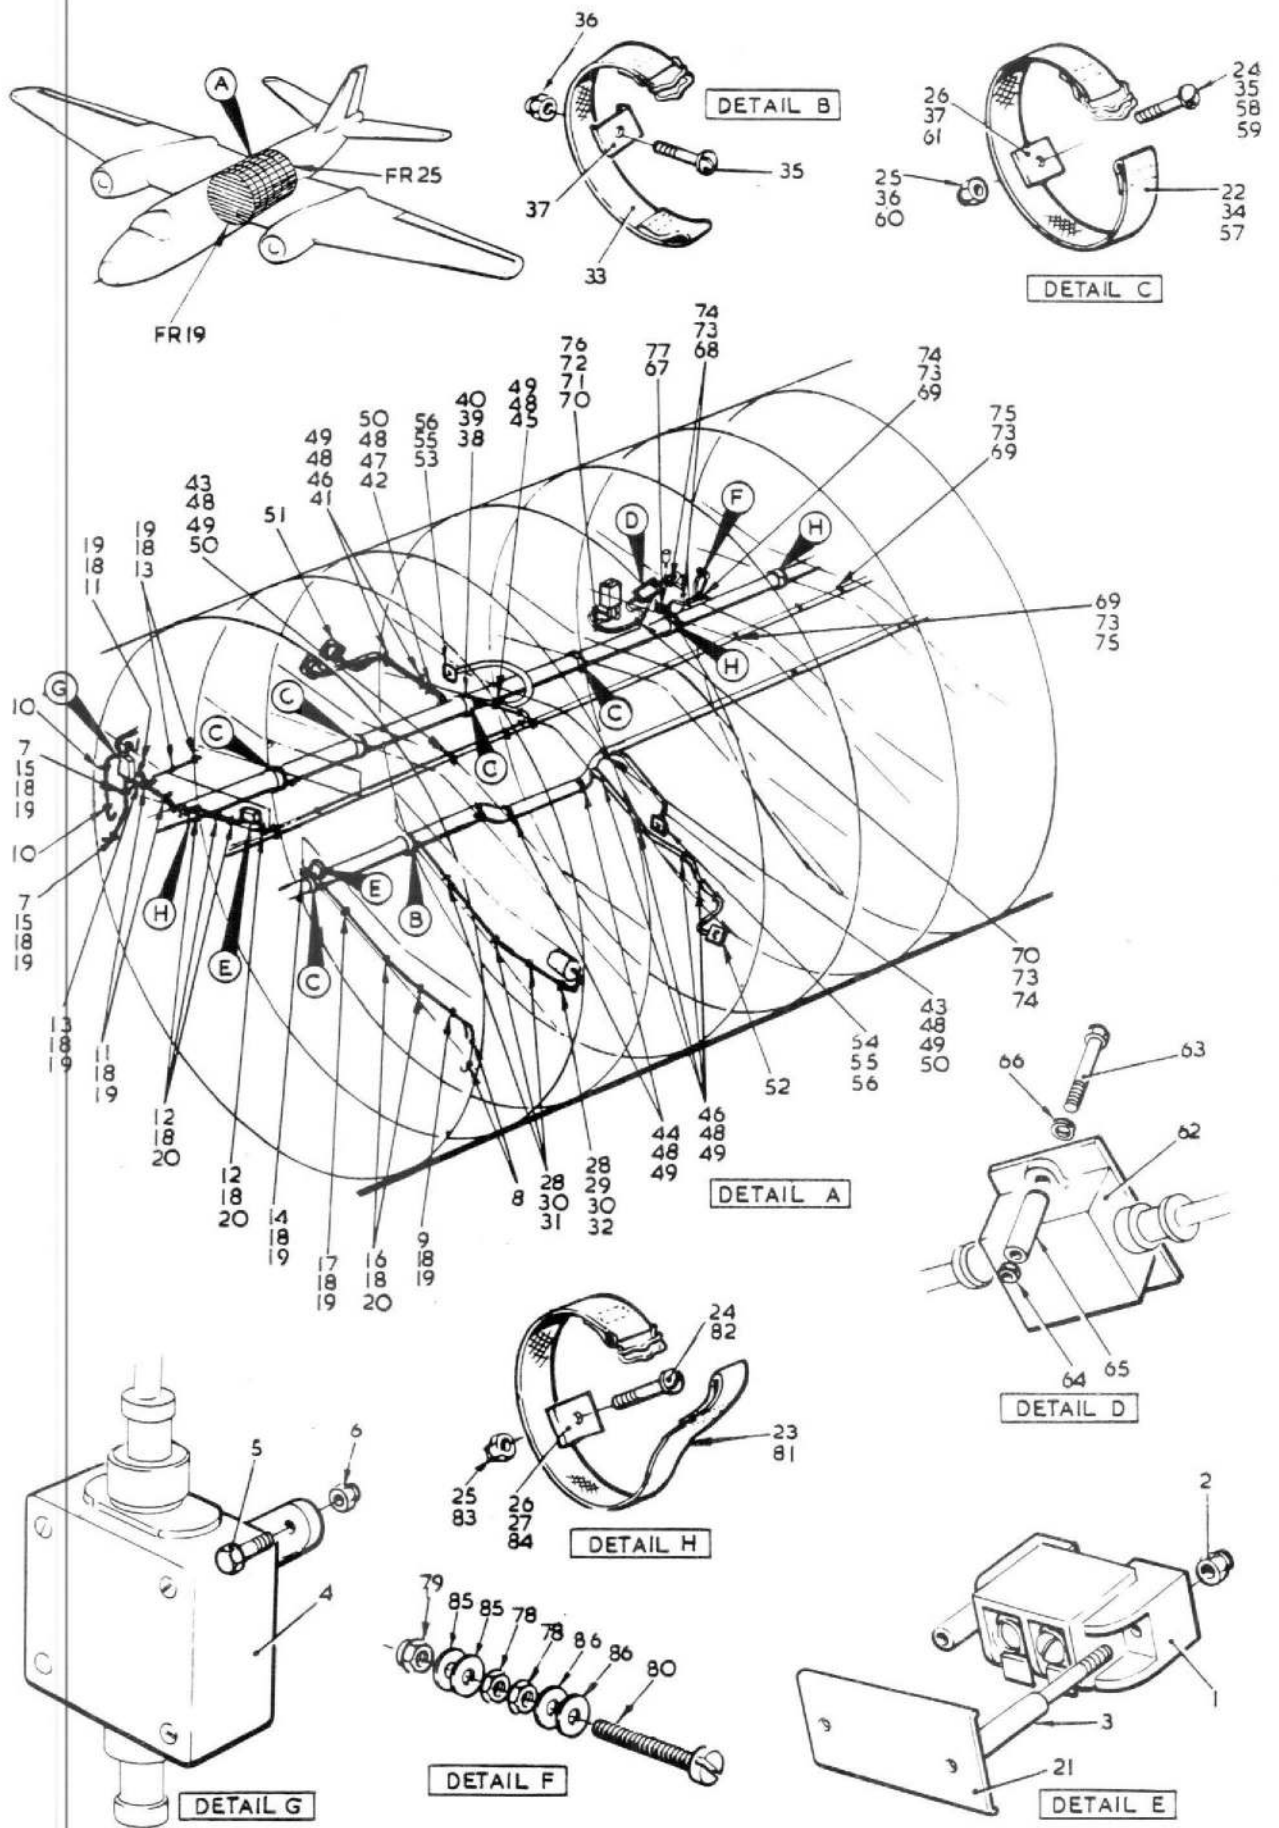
ELECTRICAL EQUIPMENT IN CENTRE FUSELAGE
